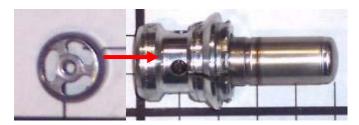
Solenoid Oil Outlet Port (Pressed into the Valve Housing Oil Dump Outlet)
